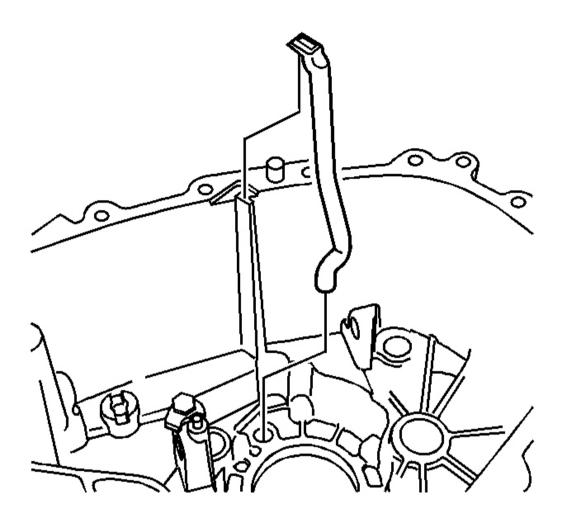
View Of Oil Tube Courtesy of GENERAL MOTORS CORP.
